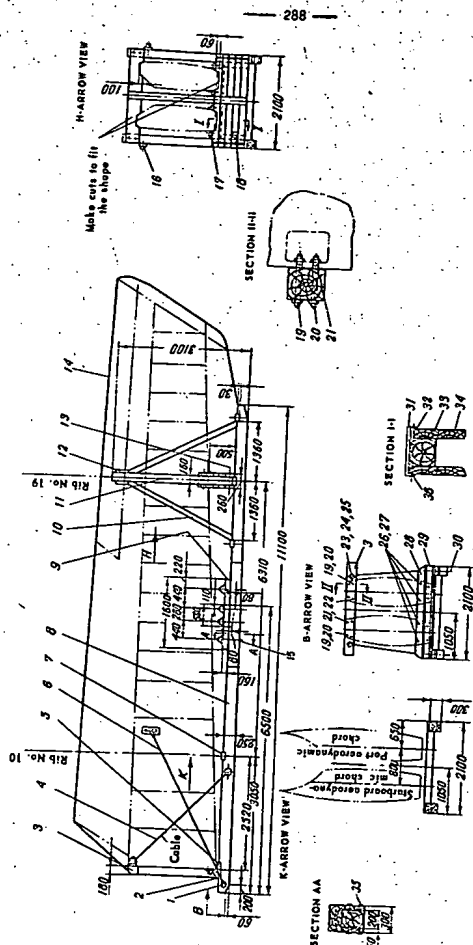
CARCASS PACKING FOR SECOND DETACHABLE WING PART
